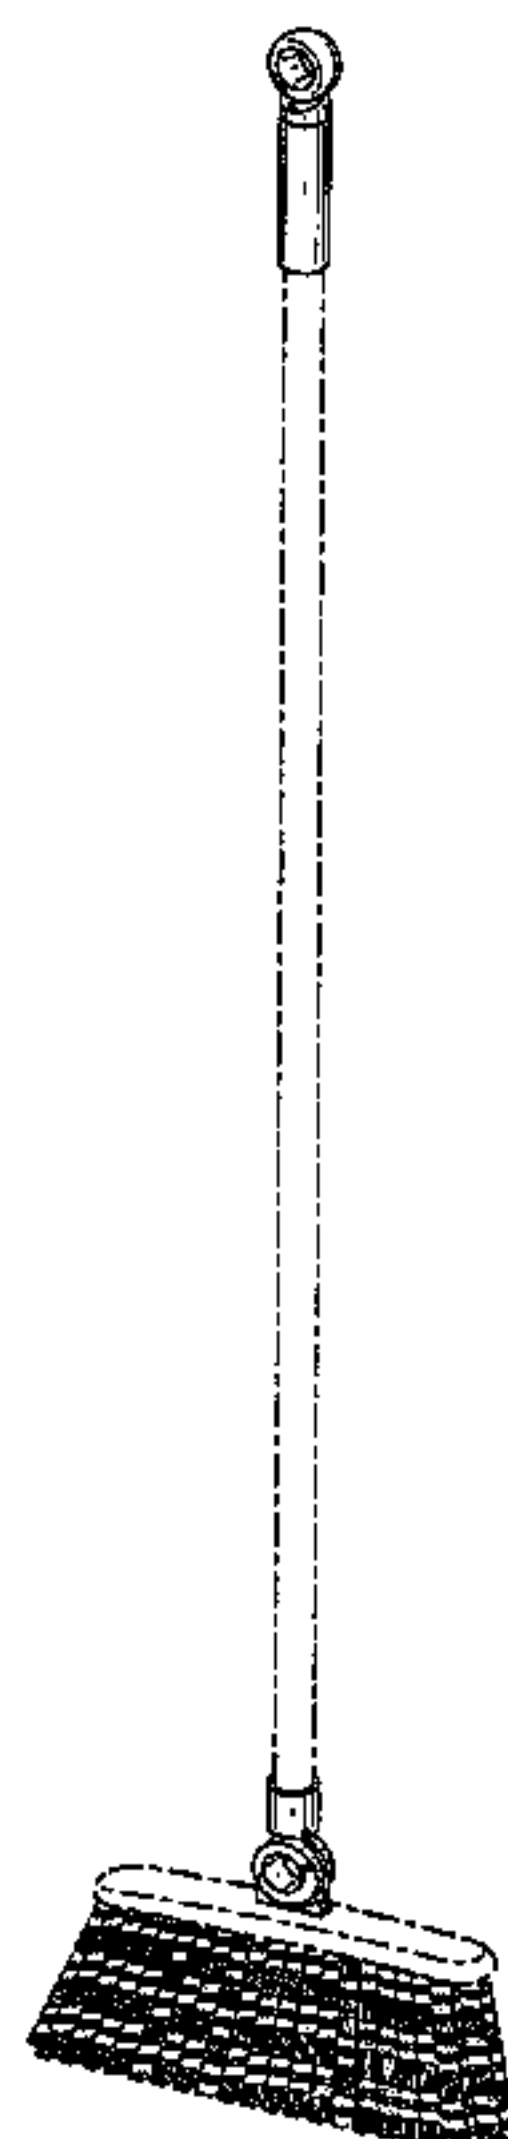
is a top plan view of the swivel broom of FIG. 9;
